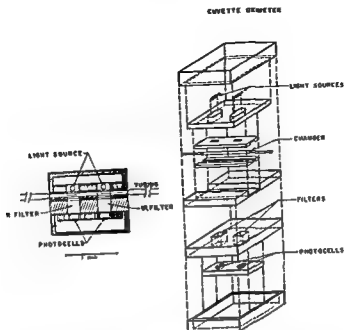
Cross-sectional view (left) of the cuvette-oximeter (to scale). Exploded view (right) to show geometrical arrangement of the light sources, chamber, and filter-photocell assembly.
